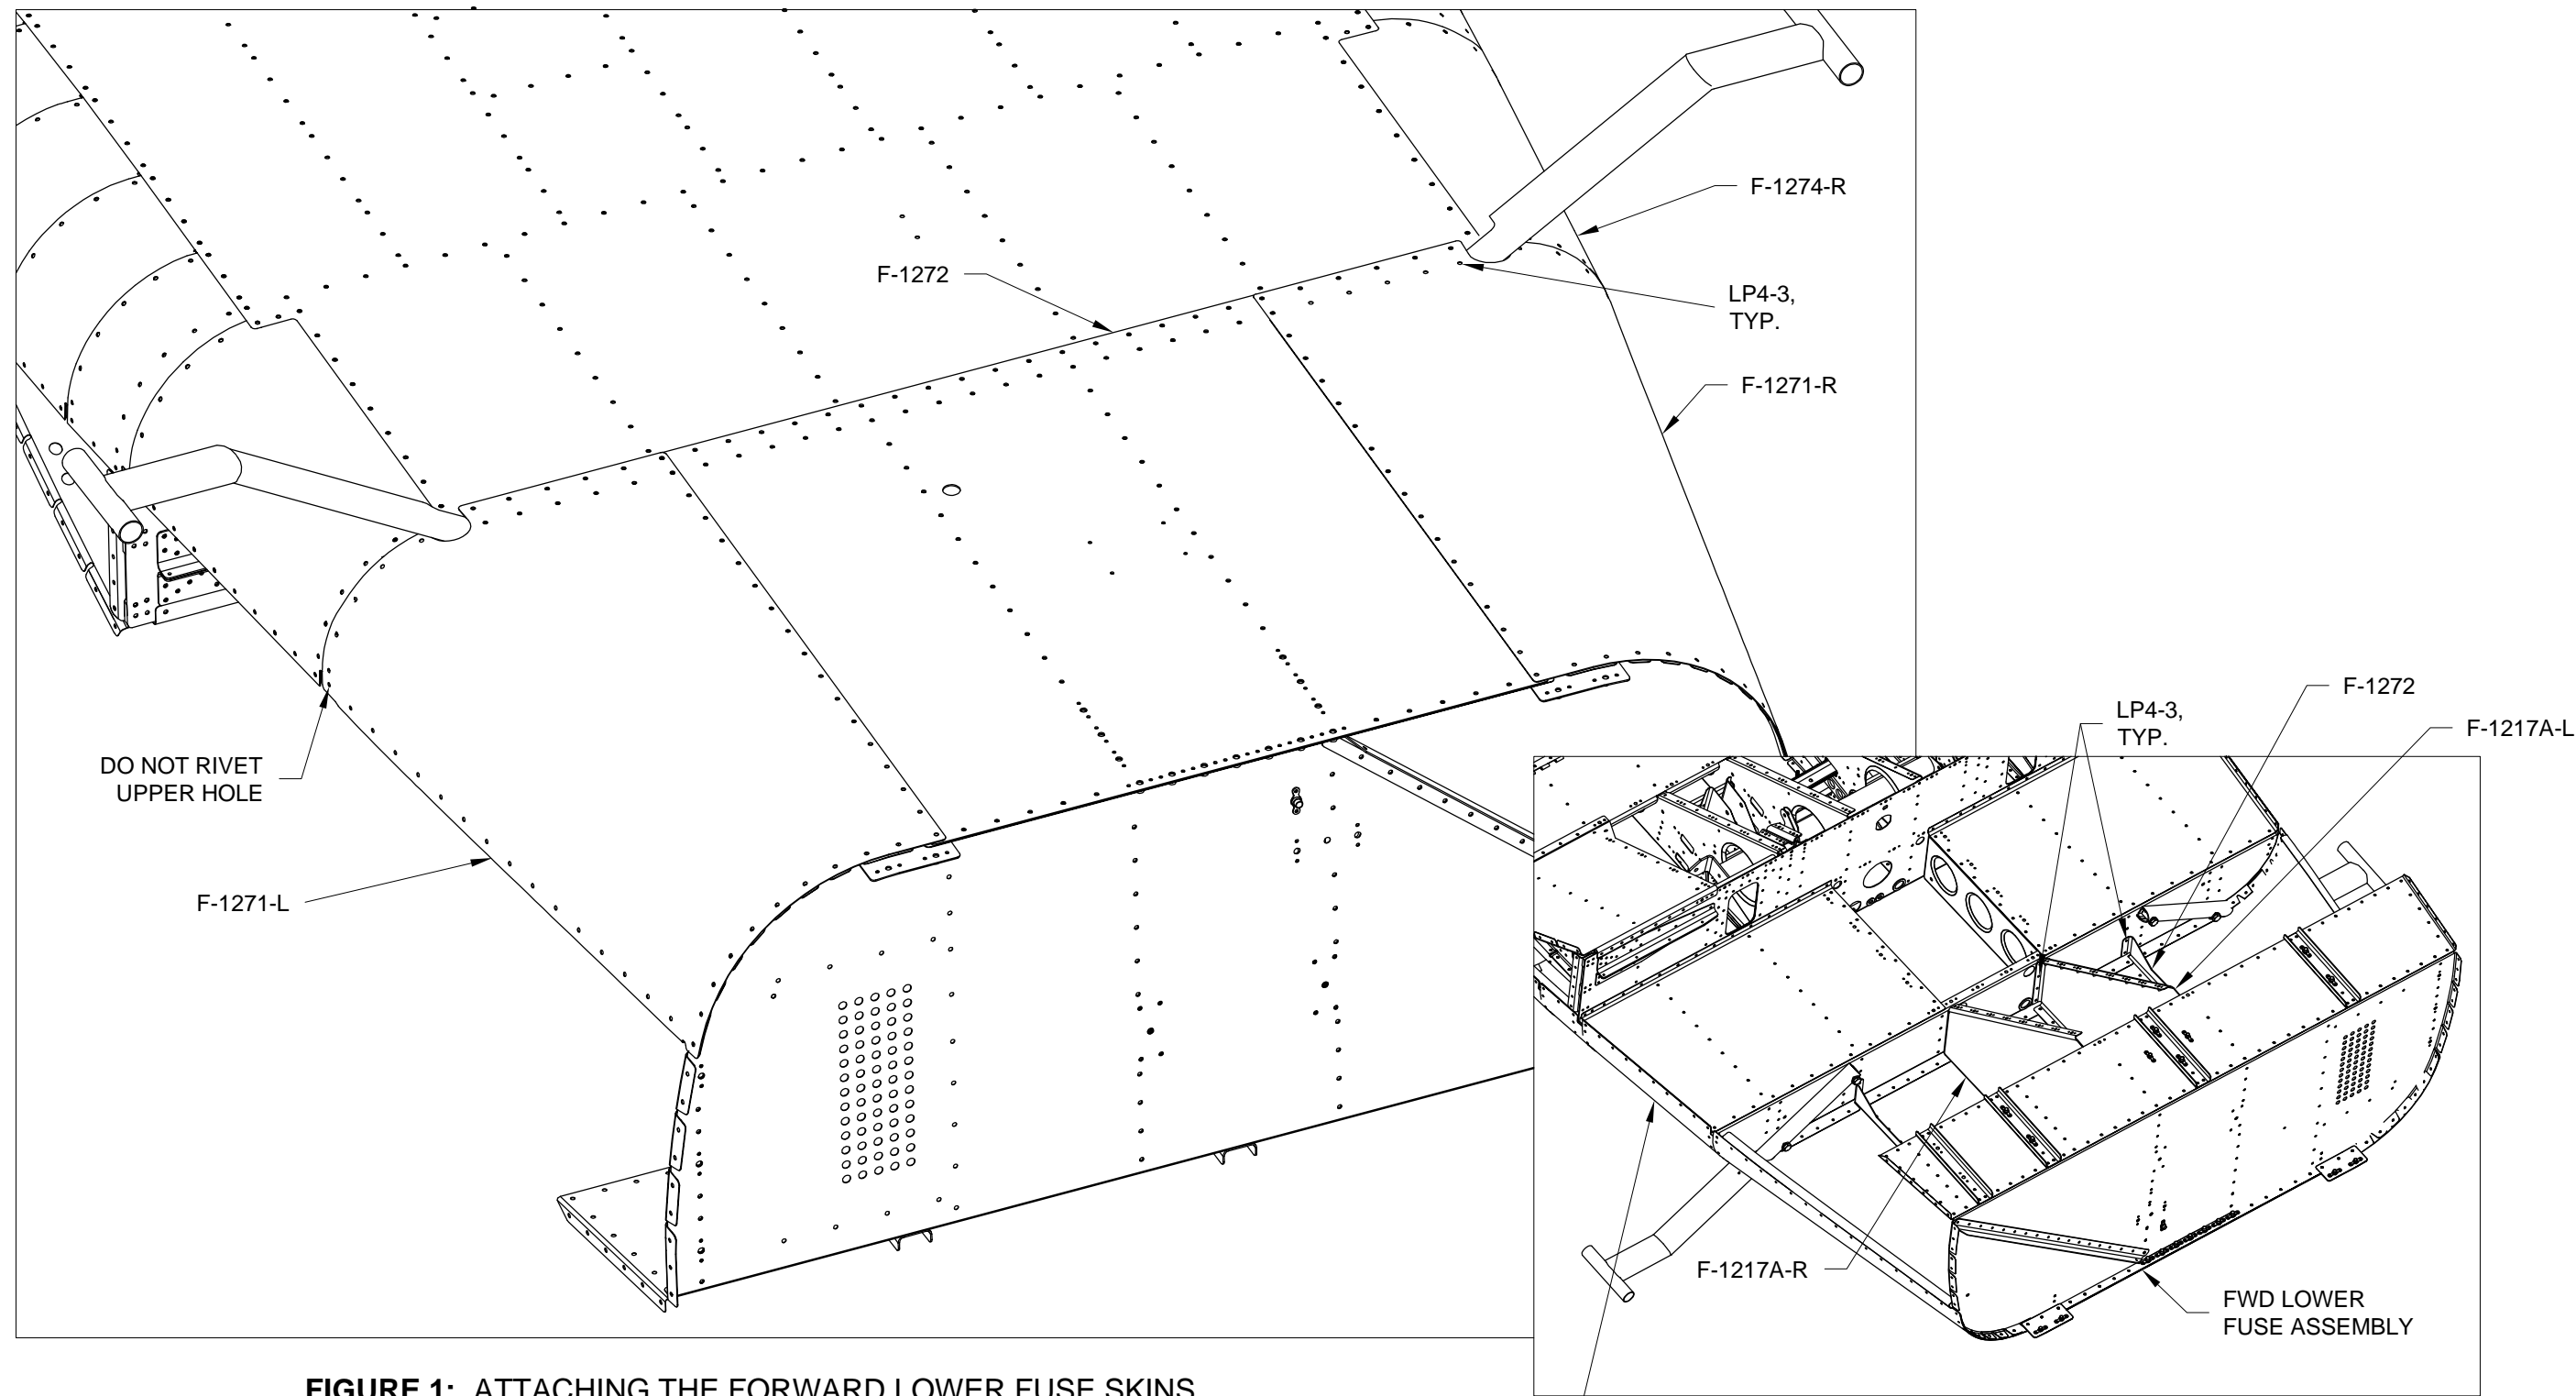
ATTACHING THE FORWARD LOWER FUSE SKINS
